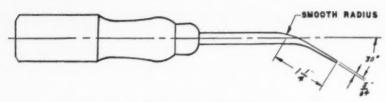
Screwdriver modification for tool to remove door regulator and remote control handles.
